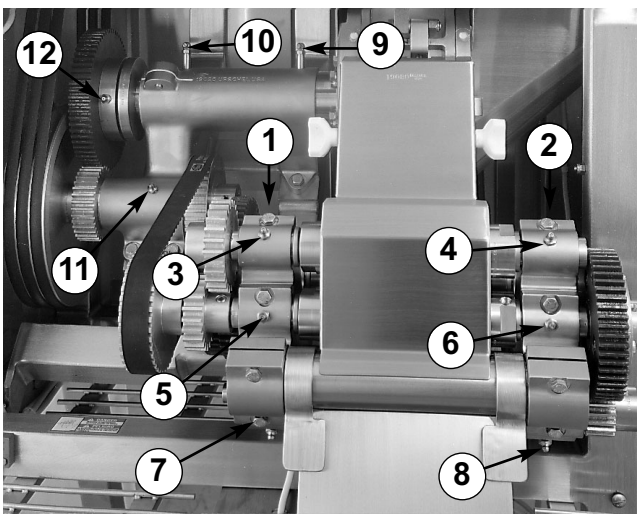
Lubrication points for dicing unit (1–8) and drive bracket (9–11). Points (1) and (2) are on the backs of side frames. Point (12) is on the shear pin hub.
